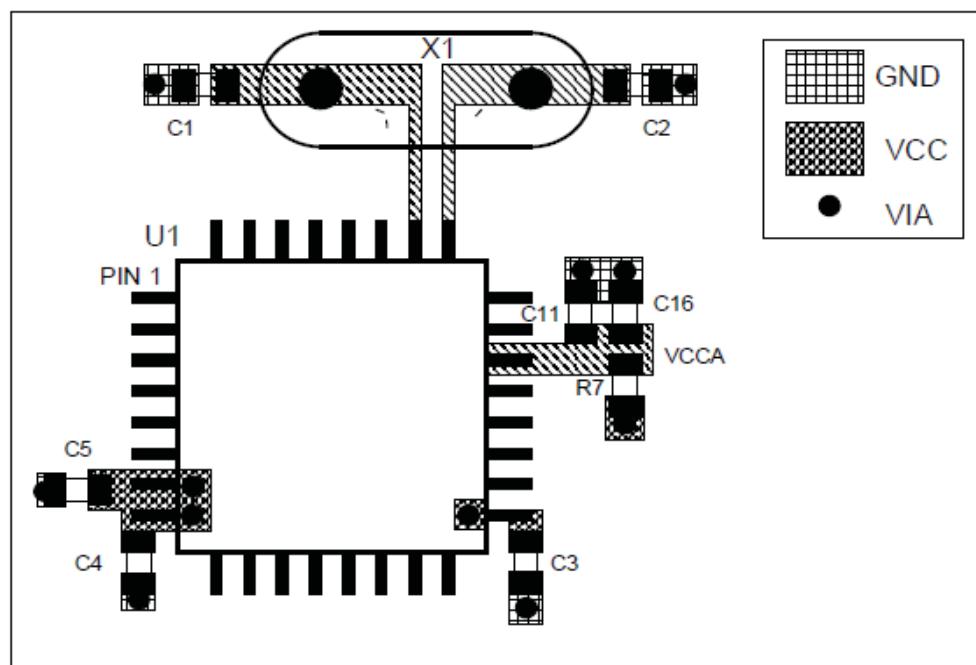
B. PCB BOARD LAYOUT FOR 84314
